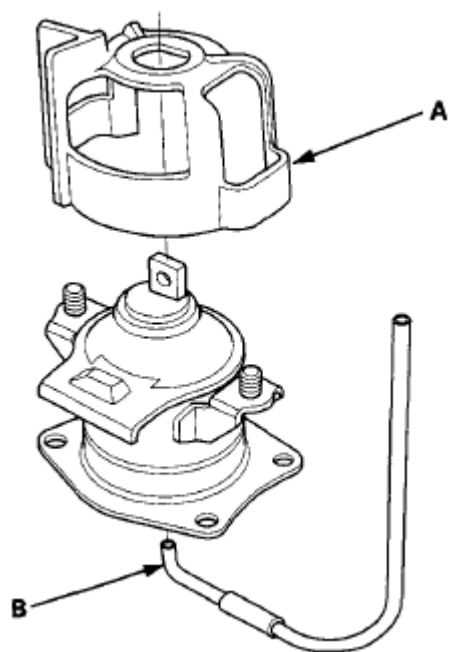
Installing Engine Mount Insulator To Engine Mount
